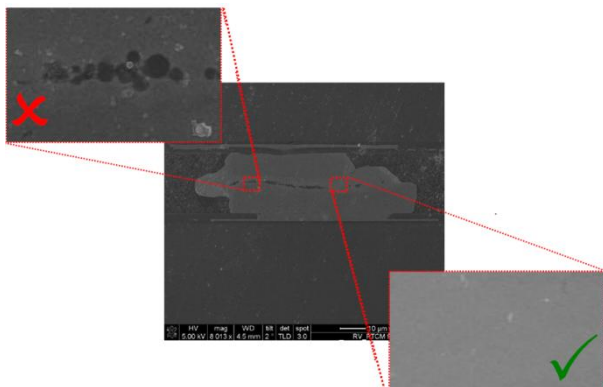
Example of UF filler entrapment between bonded bumps (Top left picture indicates areas with entrapped filler, while the bottom right picture shows area filler-free)
